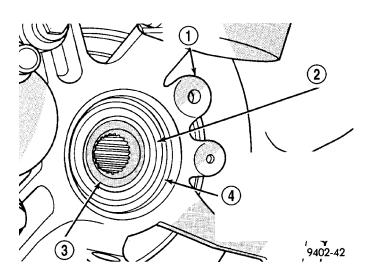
Steering Knuckle to C/V Joint Sealing Area
